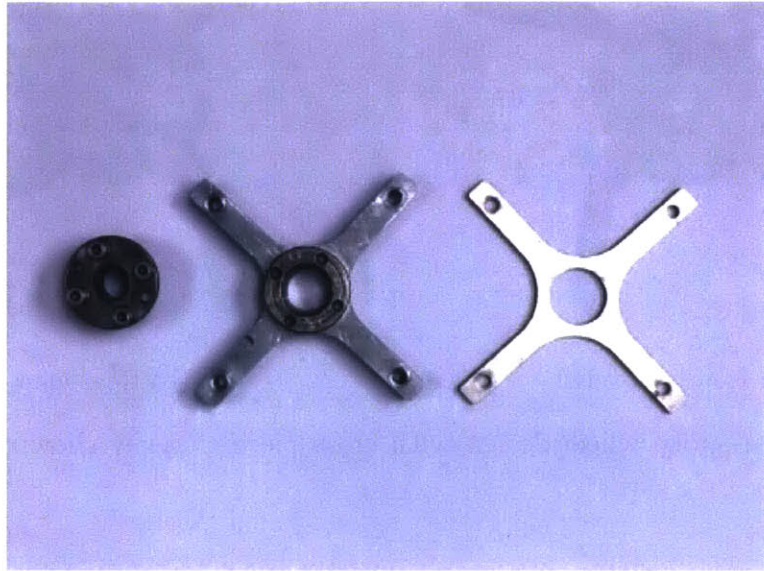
Cross pieces along with cylindrical clamp that together were used to couple four-spoke wheels to the motor output shaft.
